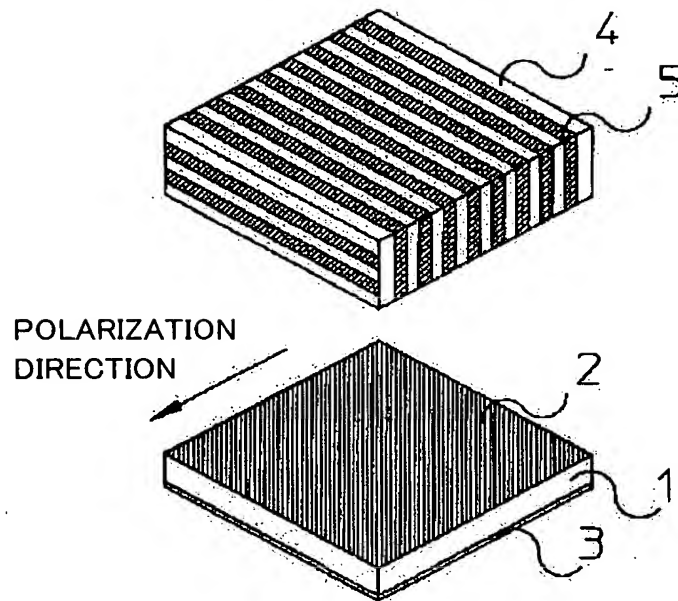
This is an exploded perspective view and a side elevation view for showing the preferred embodiment 7 of this invention.
